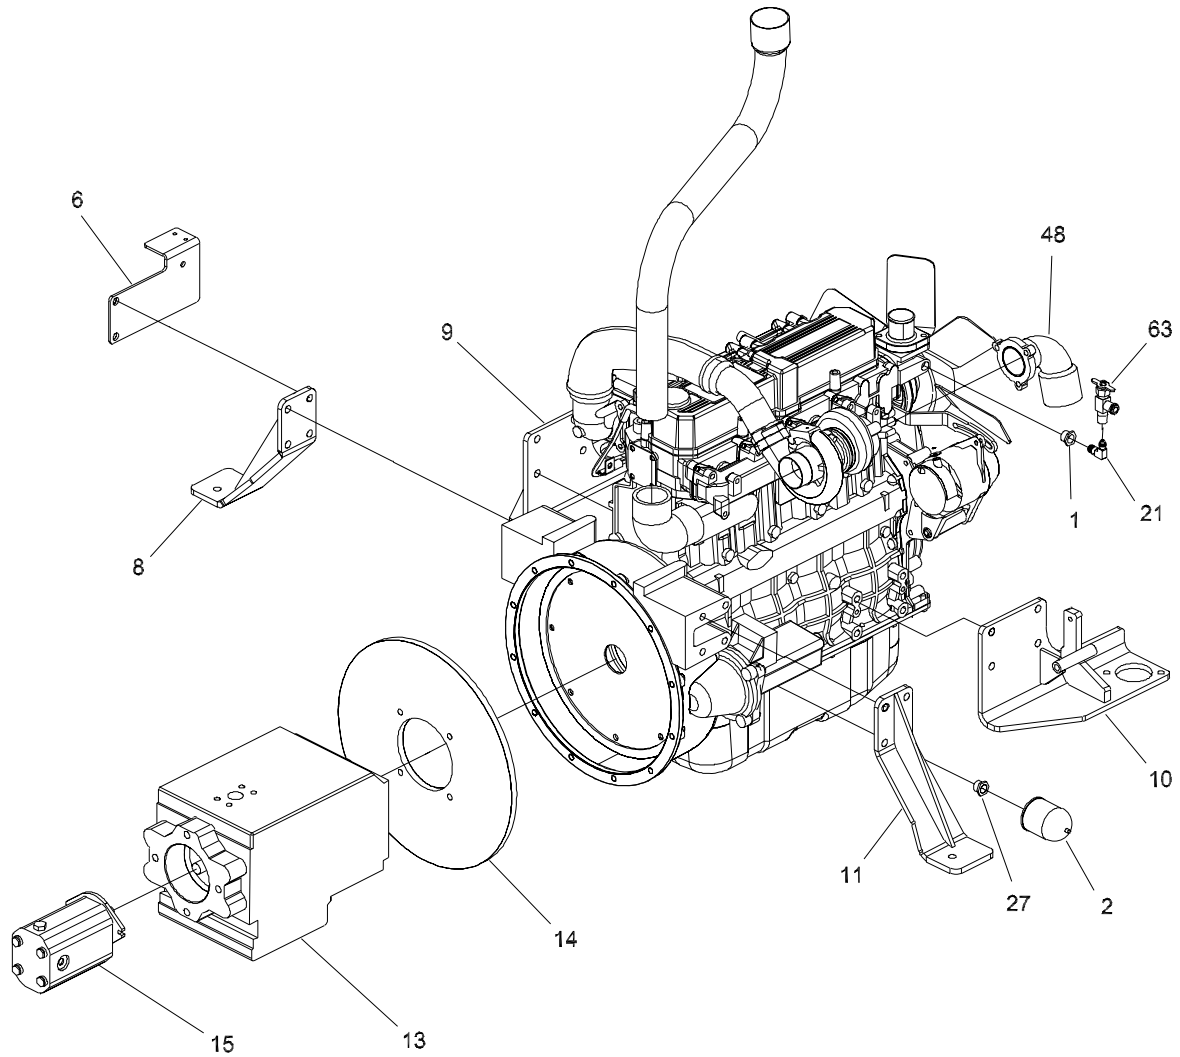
ENGINE SUBASSEMBLY, CATERPILLAR (SHEET 2 OF 2)
